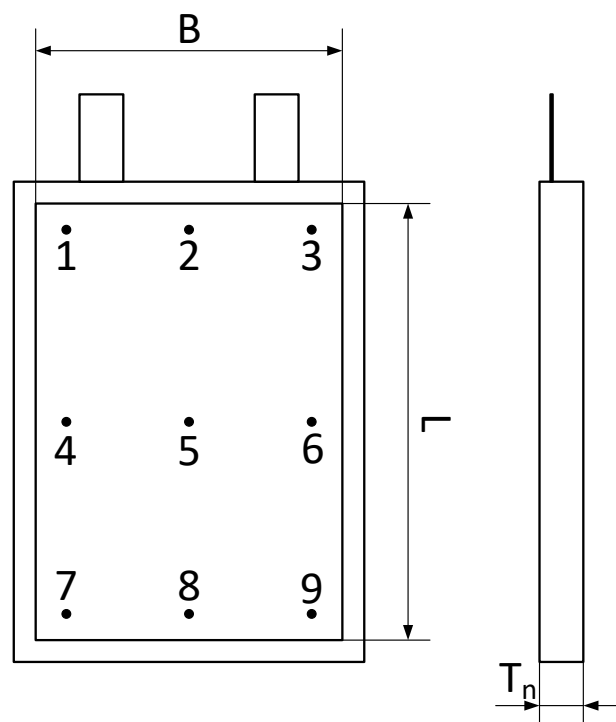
Dimensions of the cell and definition of measurement points for thickness measurement.
